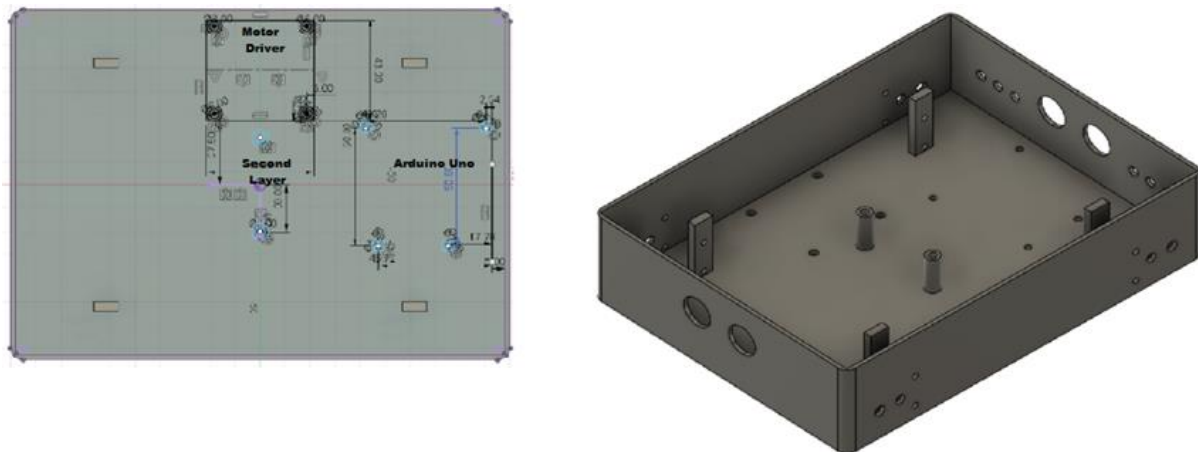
sketch and extruded body of the mounting holes for the Arduino, motor driver and second layer
